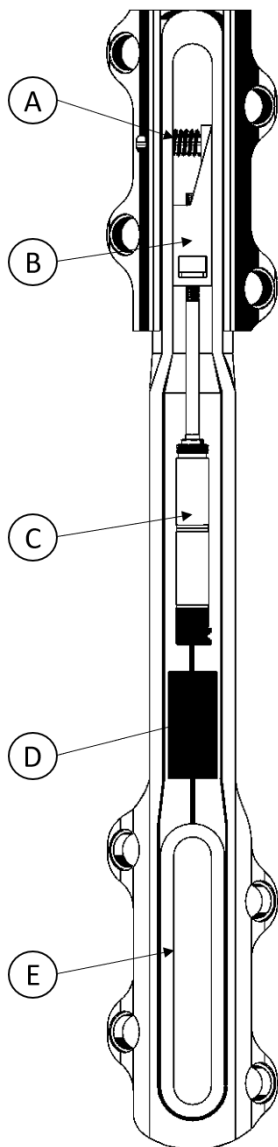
Detail of the internal actuation system of the plate: A. pin; B. wedge-shape block; C. brush motor; D. receiver circuit; E. receiver coil.
